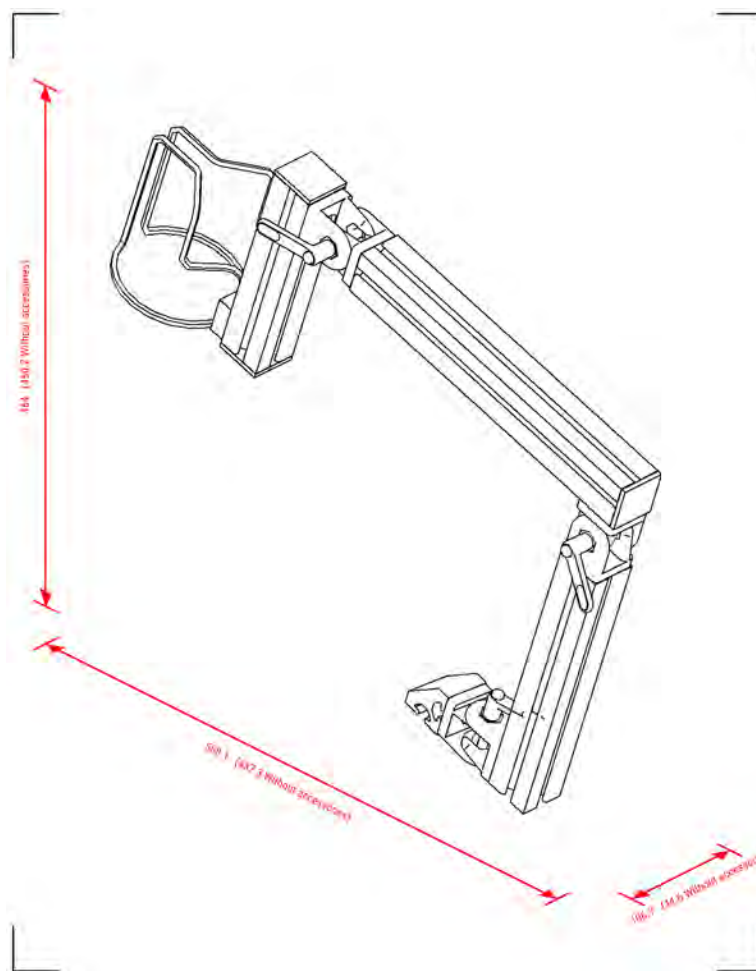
Isometric view of the MSOT probe holder flexible arm. Designed to hold the MSOT 3D probe this piece was designed with the ITEM engineering tool (<https://item.engineering/>).
